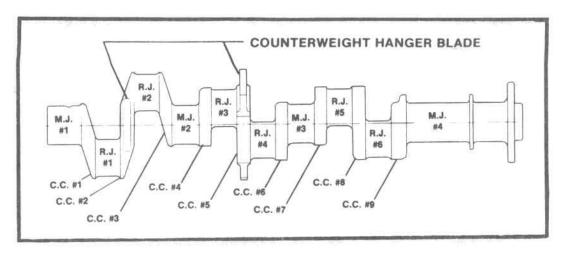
CRANKSHAFT NUMBERING.
